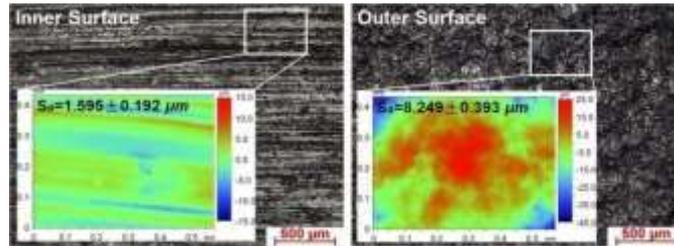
Surface finish of components formed in E-SPIF with rigid tool: (a) inner surface and (b) outer surface
